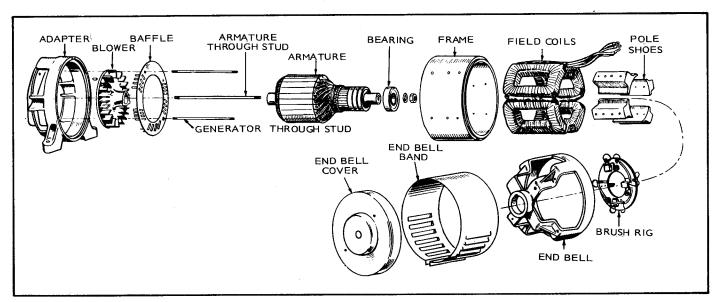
AJ, CCK, CCKB 4 POLE GENERATOR ASSEMBLY
